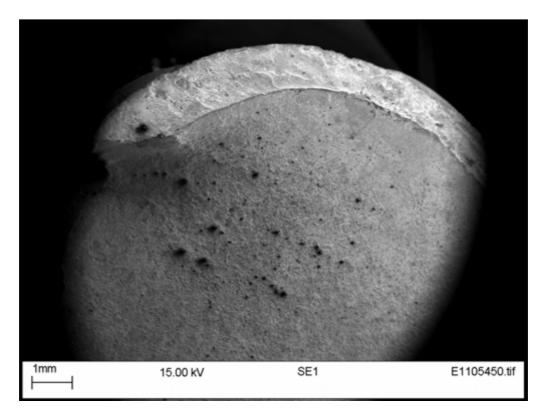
SEM fractograph, showing terminal fracture region of a 45° shear like fracture.
